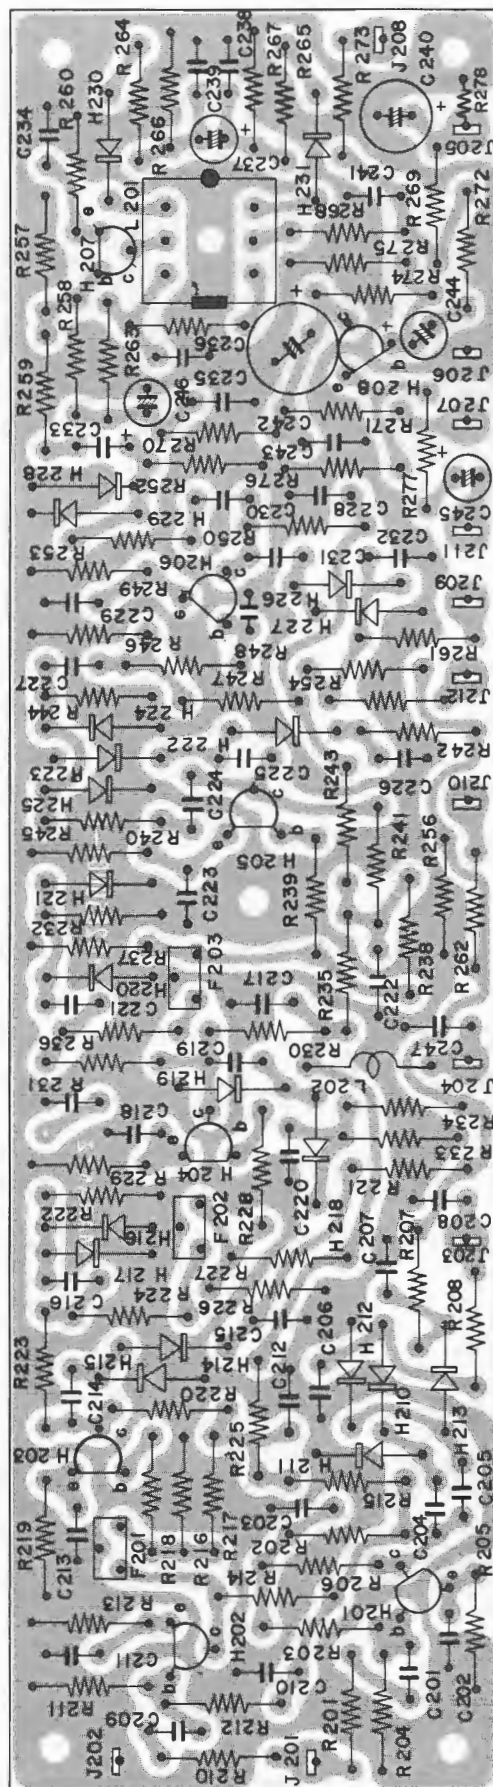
FM IF Amplifier Assembly P200 Component Locations
